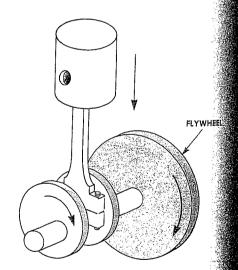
A heavy wheel called the flywheel with the crankshaft.
